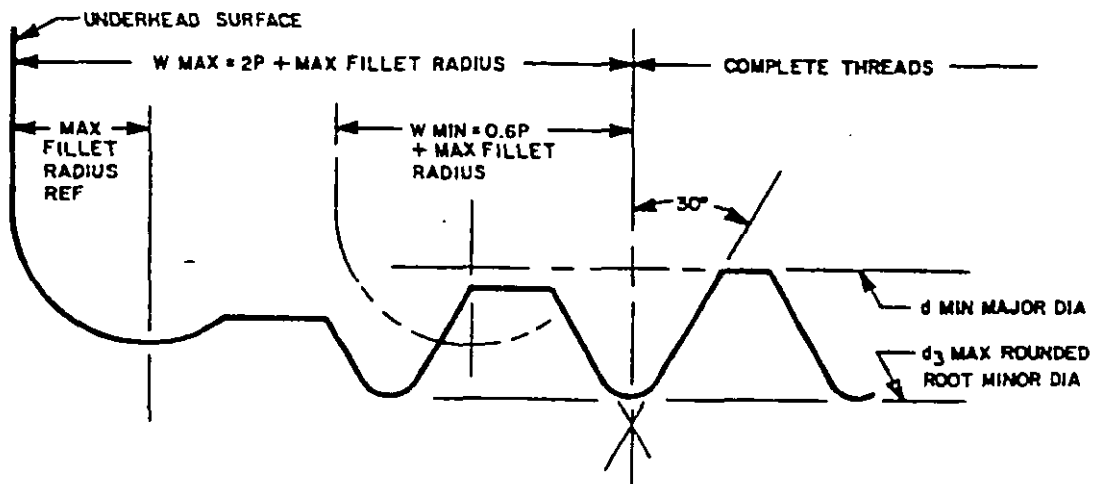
PITCH DIAMETER SHANK FASTENER - THREADED TO HEAD
